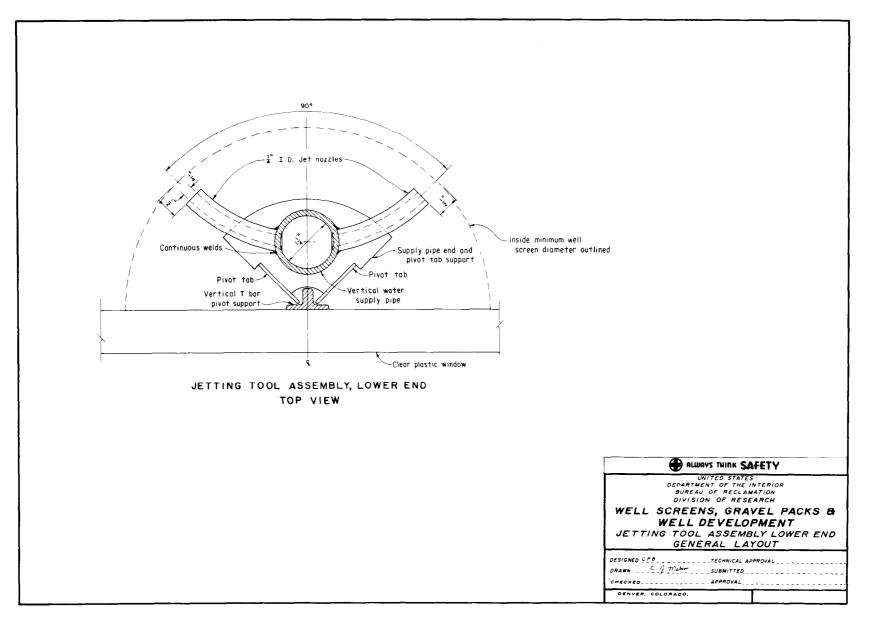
High-velocity water jetting tool assembly - lower end top view.
